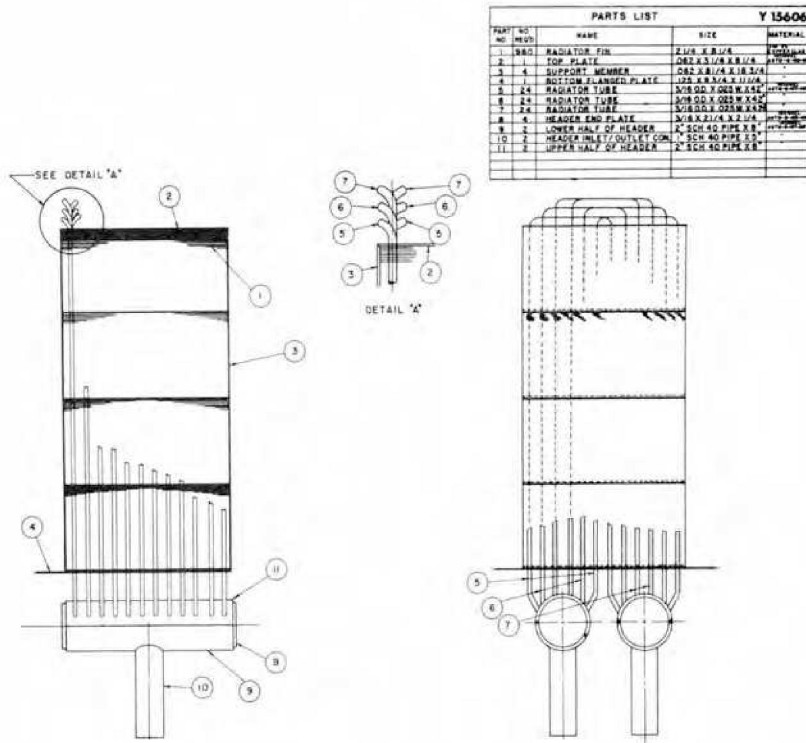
Assembly Drawing of 500-kw NaK-to-Air Radiators.
